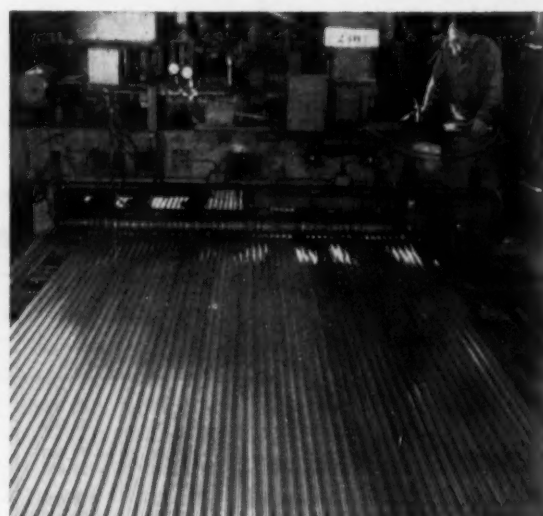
Seam-welding a trailer side. Six corrugated sheets and edge are simultaneously joined.
